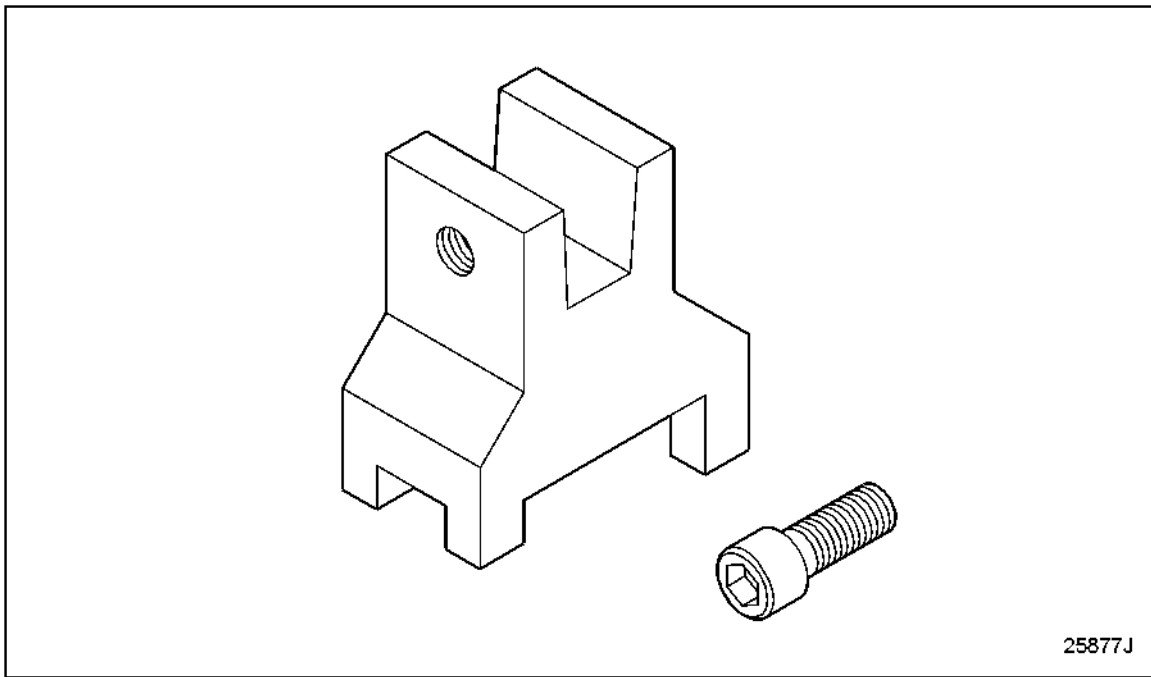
Valve Bridge Holding Fixture,J 21772
